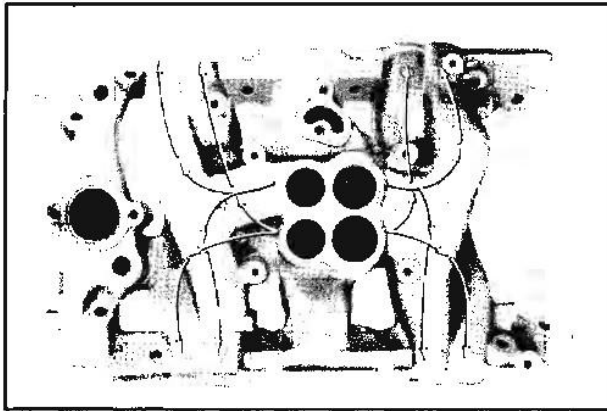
Intake Manifold - Four Barrel Carburetor
